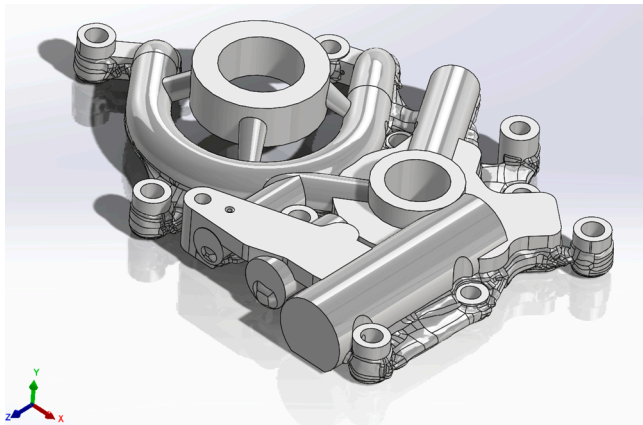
SolidWorks CAD model of the tested 3D printing part.
